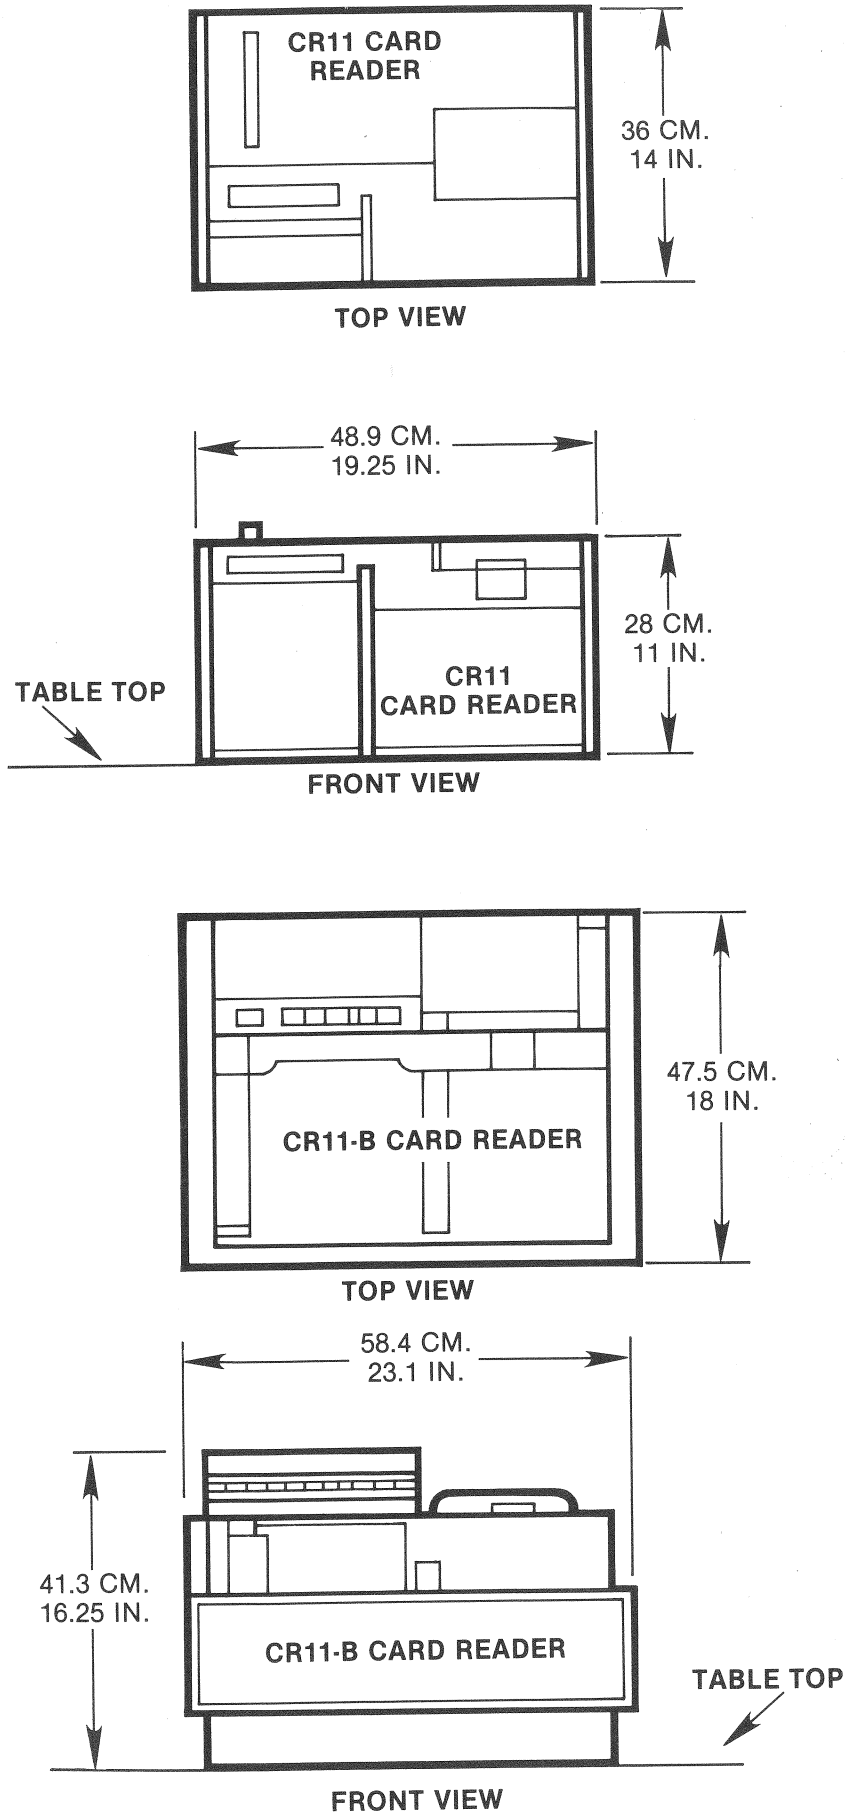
CR11 and CR11-B Card Reader Unit Dimensions
